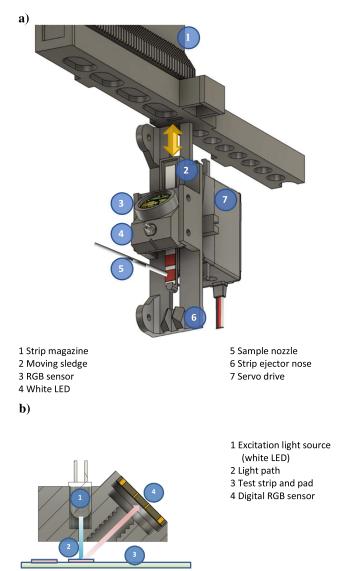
a) Design of the test strip sensor. b) Optical measurement chamber for color measurement of the strip pads.
